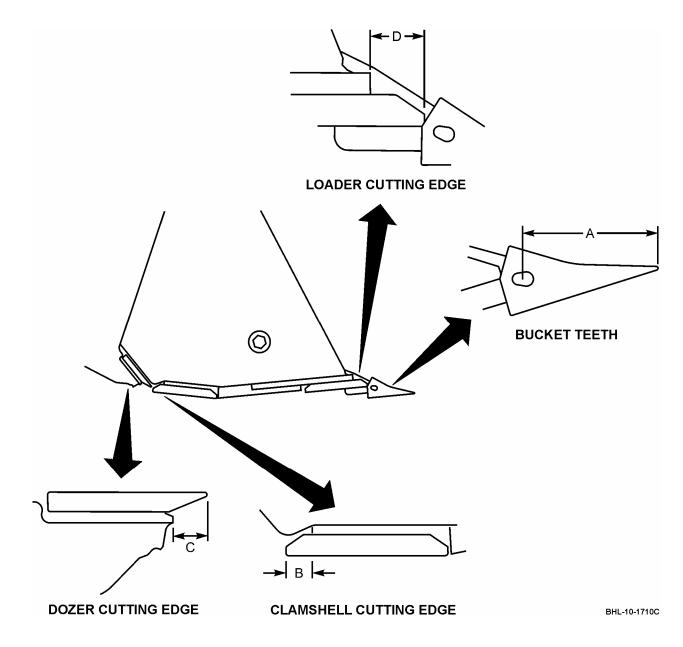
FEL Bucket Teeth and Cutting Edges Measurement.
